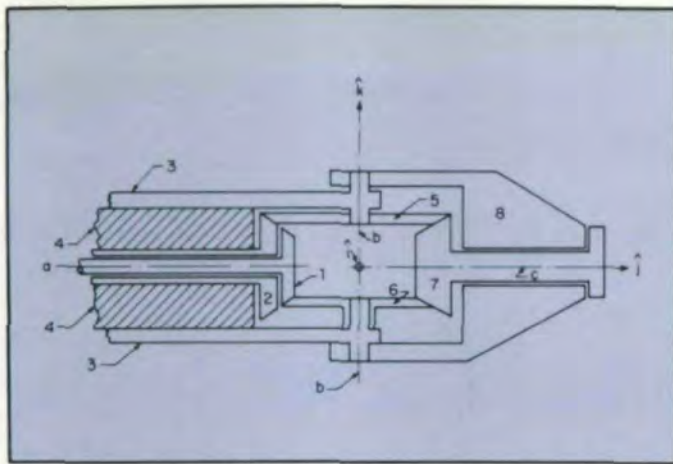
Cross section of robotic gear train shown in [2]; "initial" position of gear train
